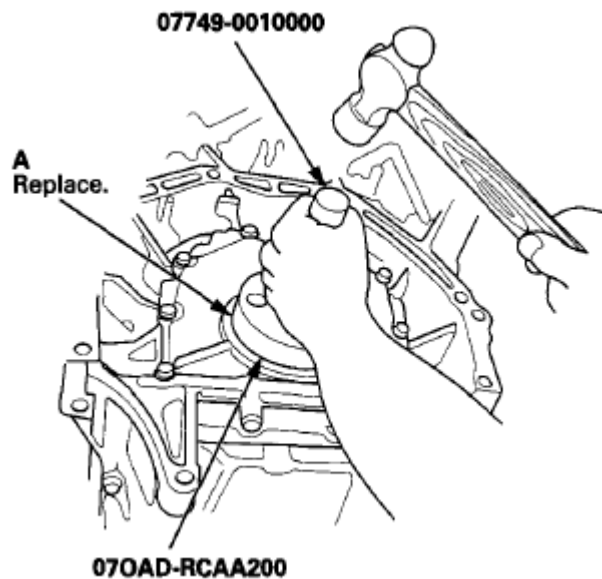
Aligning Hole In Driver Attachment With Pin On Crankshaft
